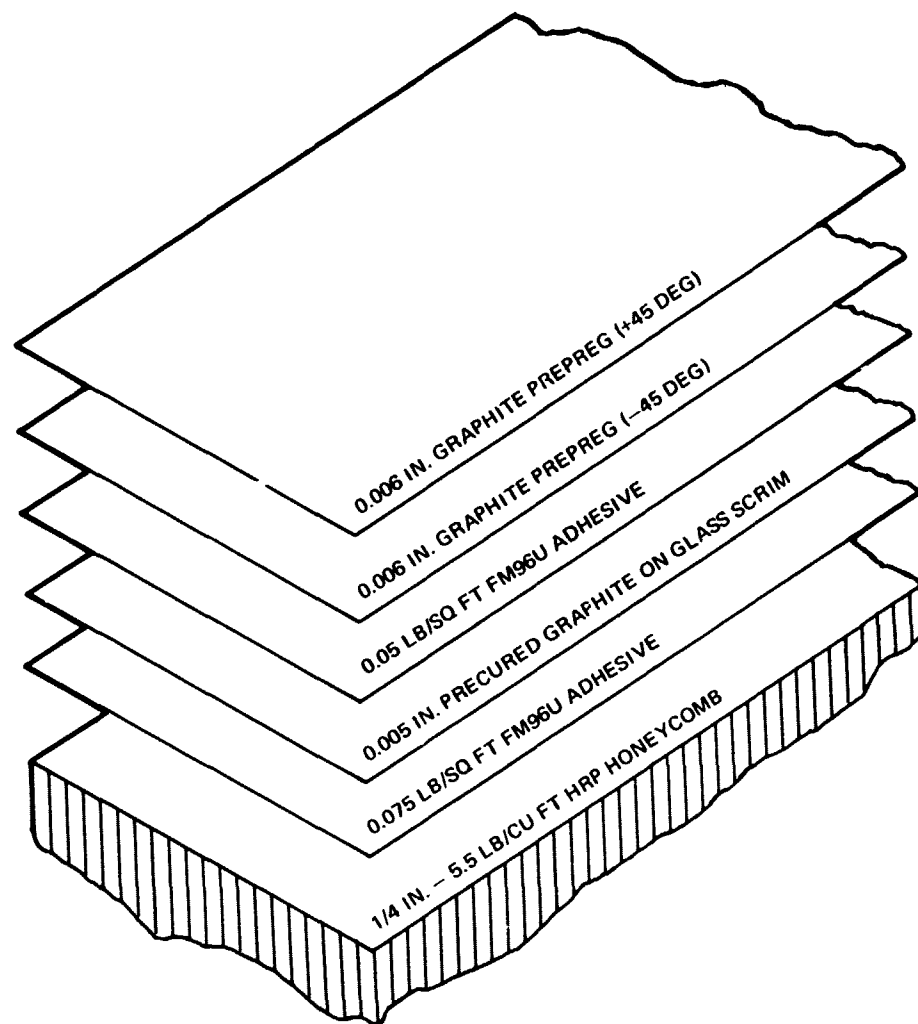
EXPLODED VIEW OF COCURE PANEL LAYUP
